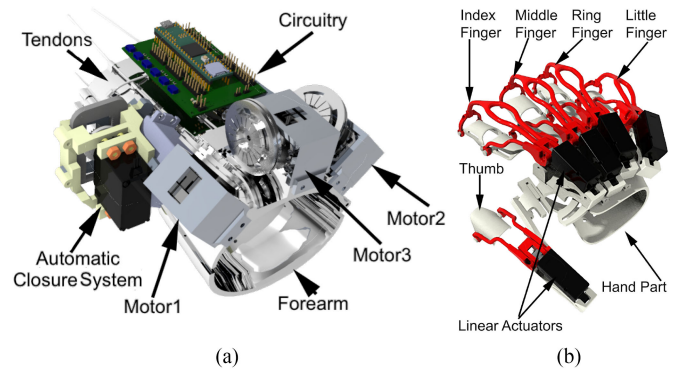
Exoskeleton prototype CAD renderings. (a) Wrist module. (b) Hand module.
